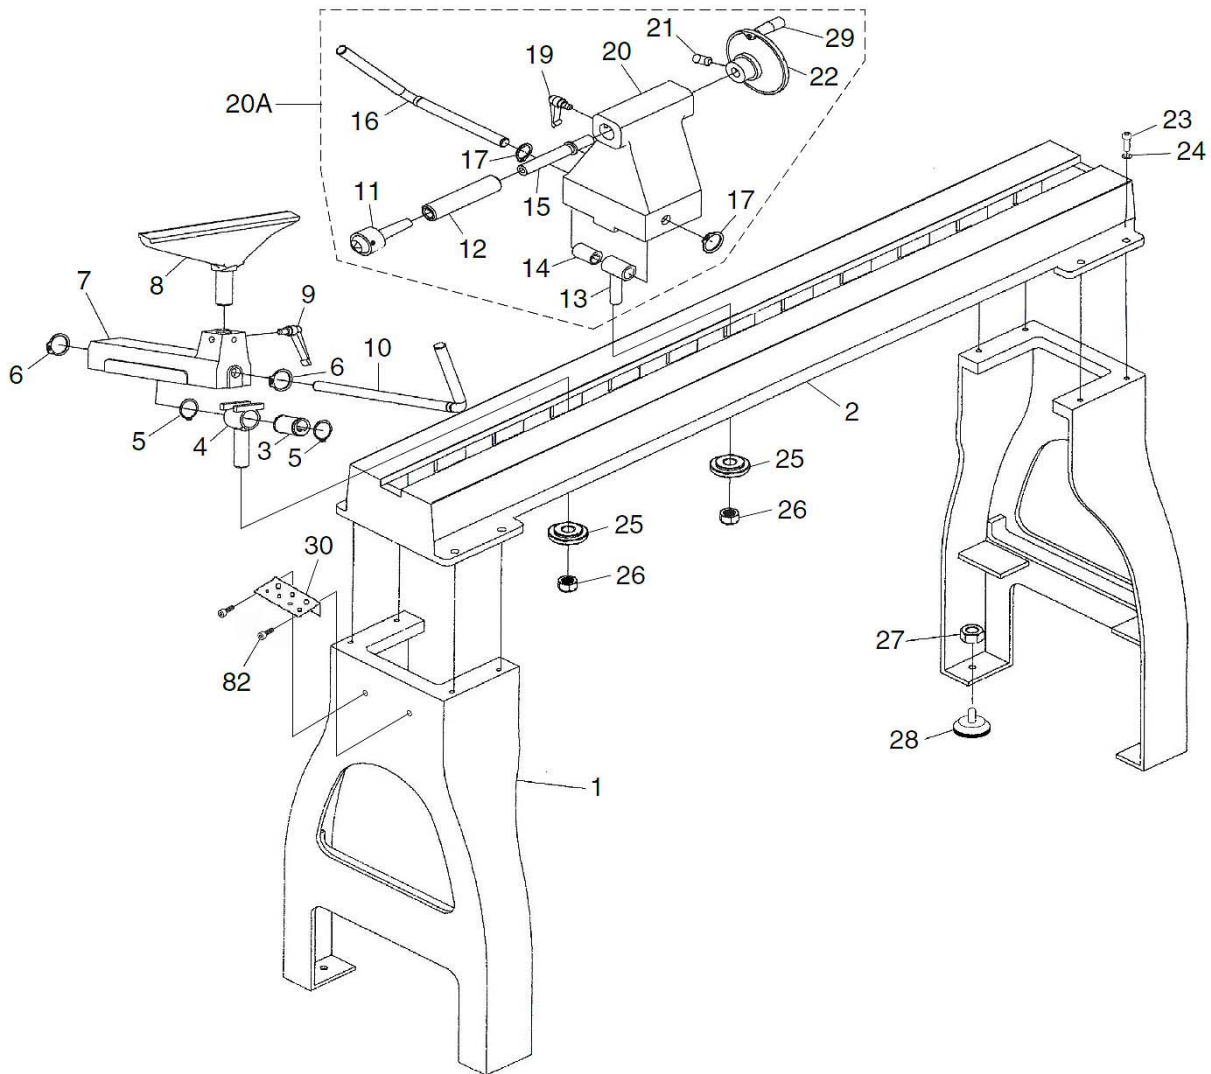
Spare parts drawing 1 Wood Lathe DB 1102 VARIO
